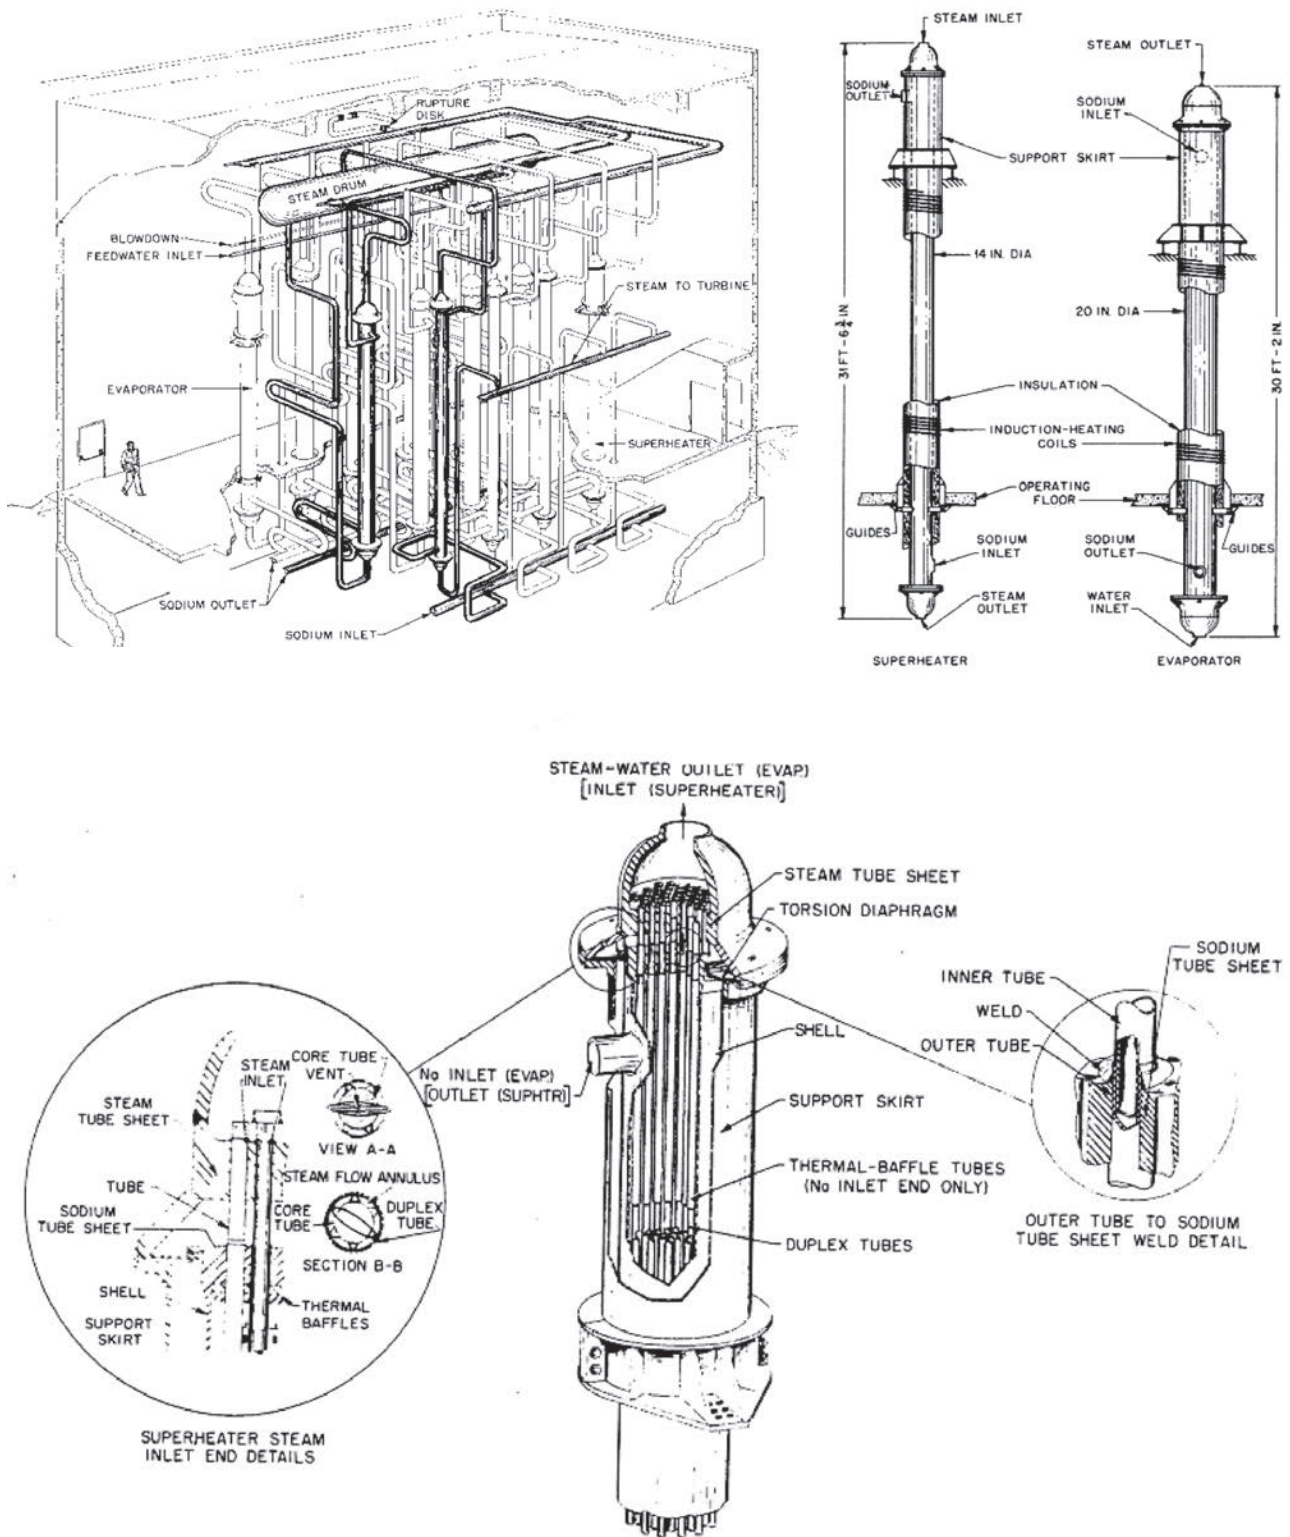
EBR-II SG, superheater and evaporator details [5.9].
